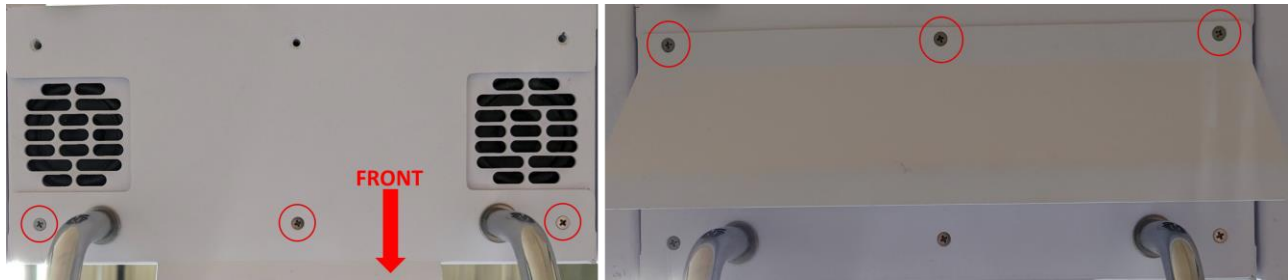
(left) Mounting the Handle (right) Mounting the Sound Deflector
